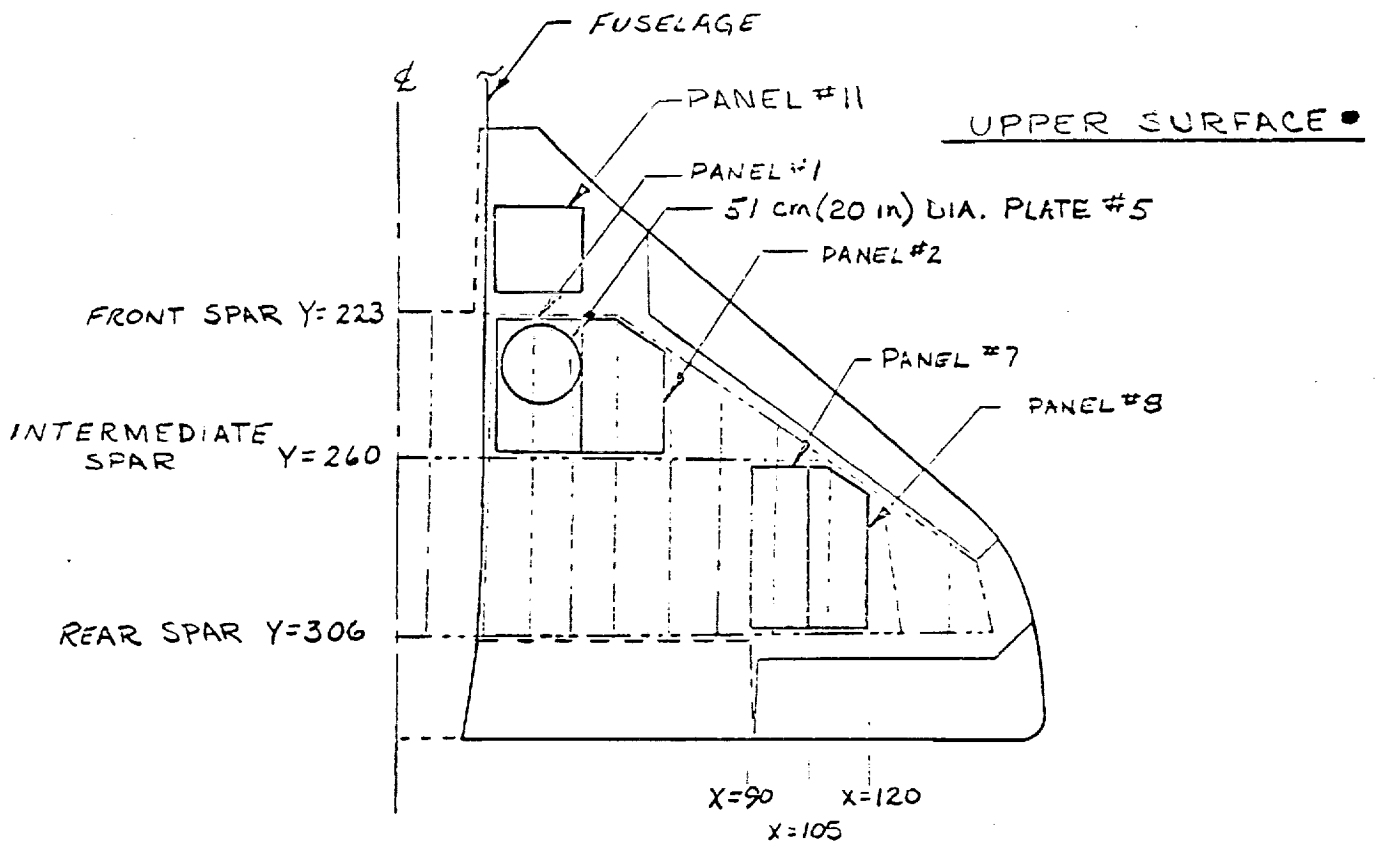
HOLE CONFIGURATION #10. GEAR DOOR LOCKED OPEN
